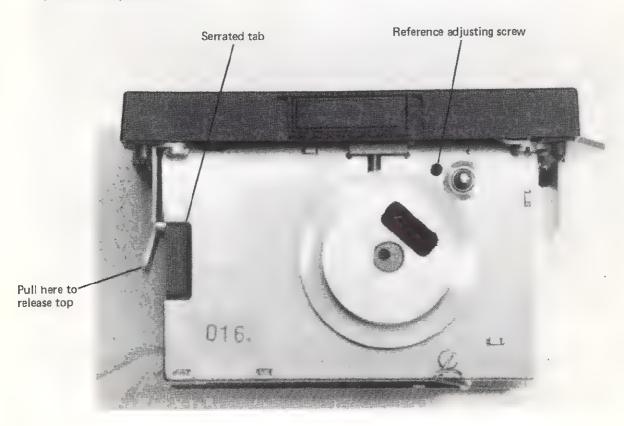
4, Removing the Punch Mechanism's Top Cover
